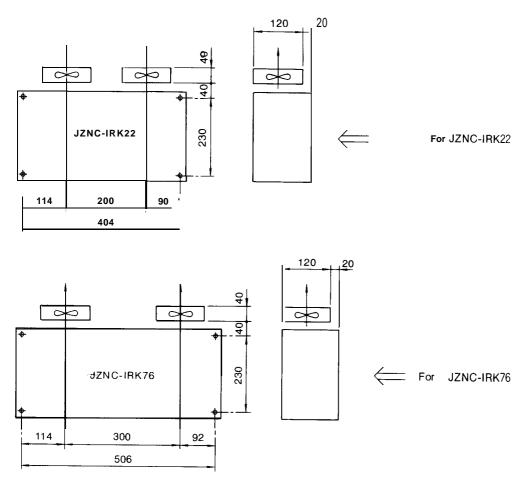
Mounting Cooling Fan (Dimensions in mm)
